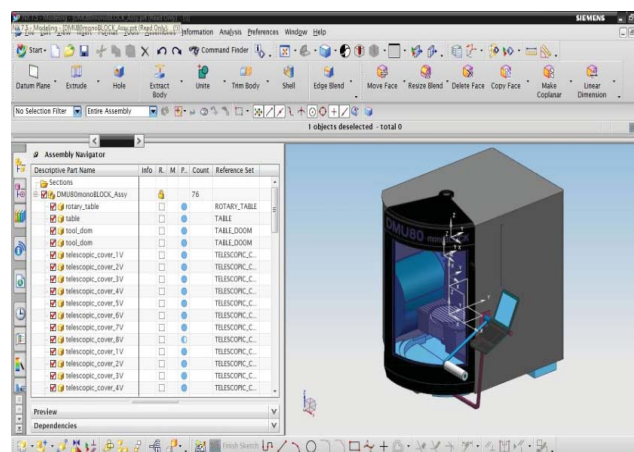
Assembly of DMG 5axis CNC milling machine model
